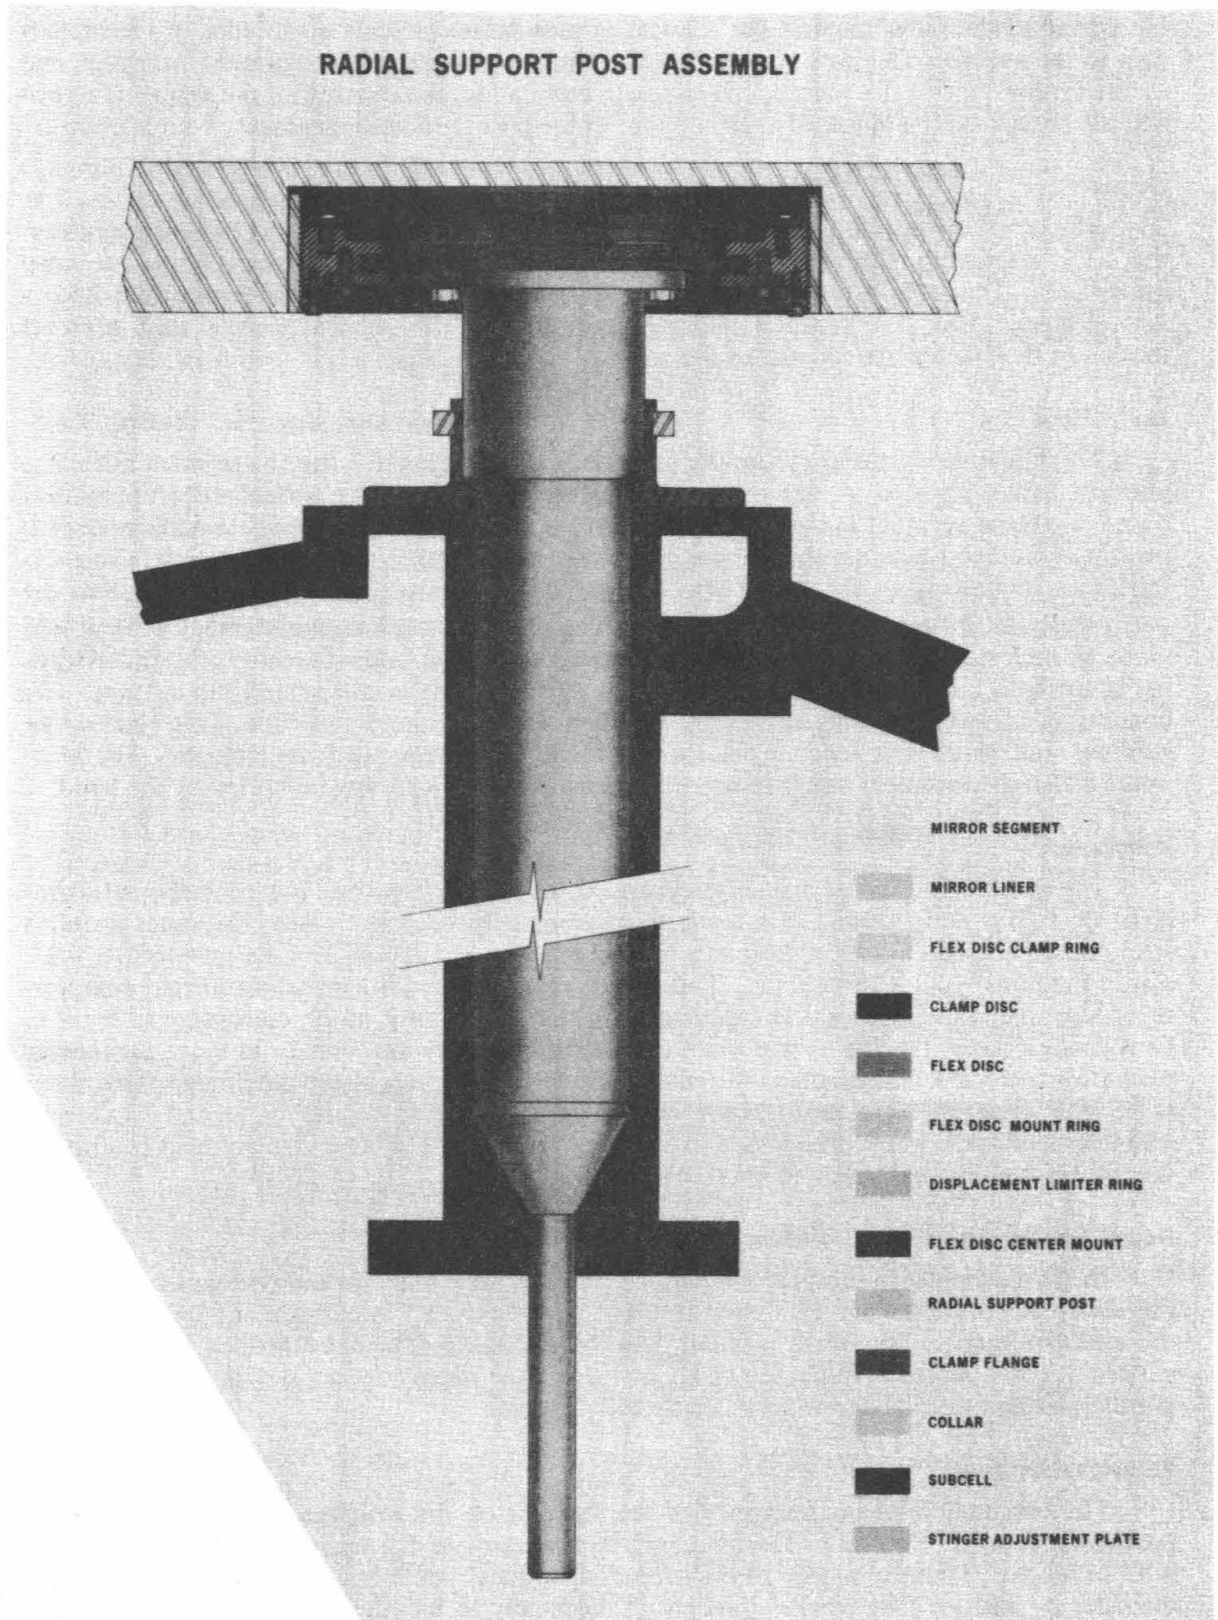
Detailed drawing of the radial support post assembly used in the active control system prototype.
